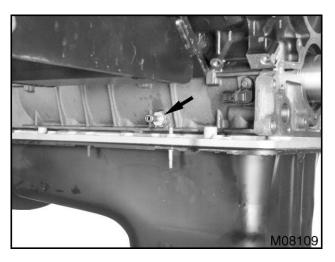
Breather oil drain assembly to crankcase M12 fitting
